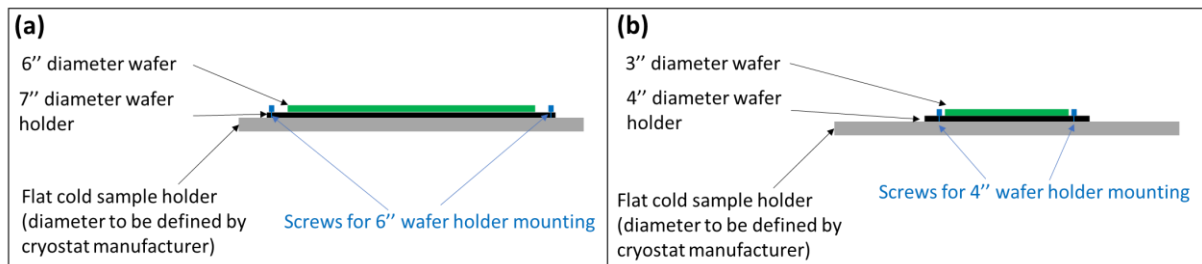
Cross section view of sample holder stack. Screws are not to scale and only presented for illustration purposes. (a) For a 6" wafer diameter mounted. (b) For a 3" diameter wafer mounted.
